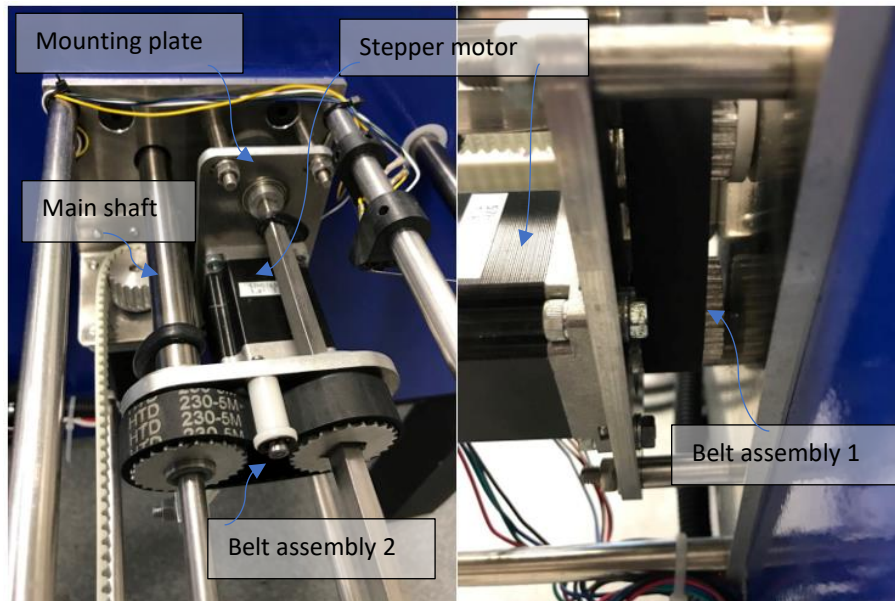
Foosball table actuation module - rotational drive assembly
